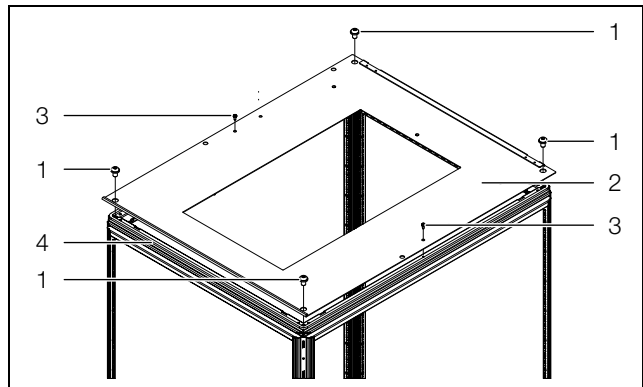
Preparation for mounting (1000 mm deep enclosure)
